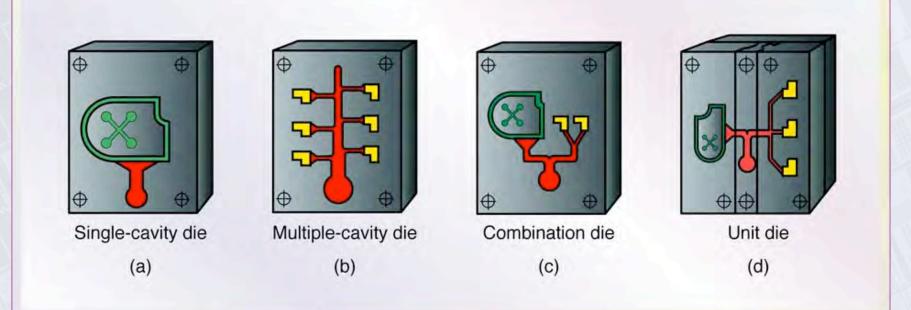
Various types of cavities in a die-casting die. *Source:* Courtesy of American Die Casting Institute.
